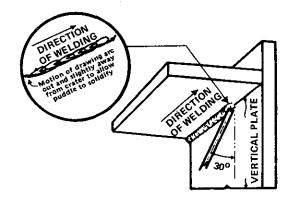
Overhead Weld Tee Joint - Single Pass
